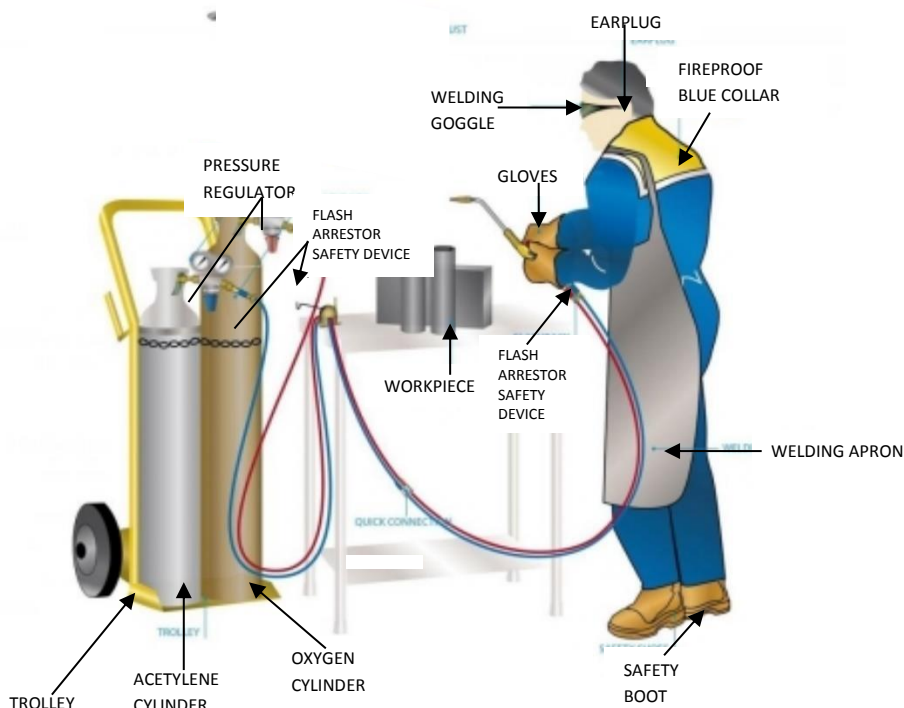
Diagram Showing Gas Welding Equipment
